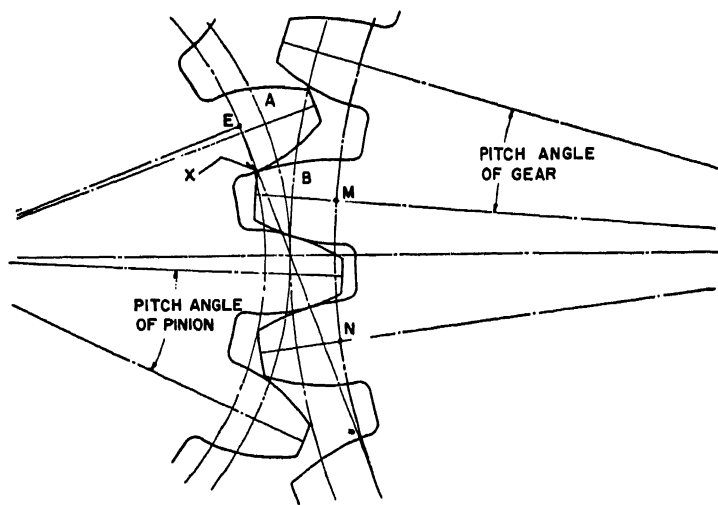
Gear Tooth Engagement—Beginning of Action.
